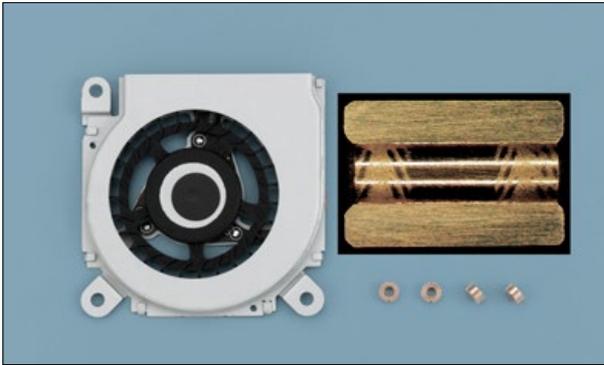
Super thin oil-impregnated sintered bearing with hydrodynamic grooves on the bore (Courtesy JPMA)
